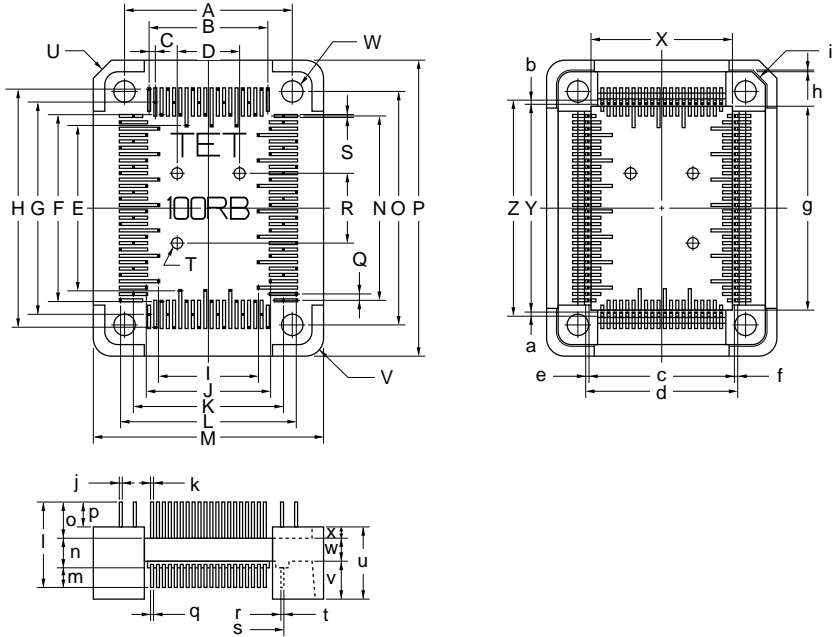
HQPACK100RB (Lid for Device Mounted) Package Drawings (Reference)
